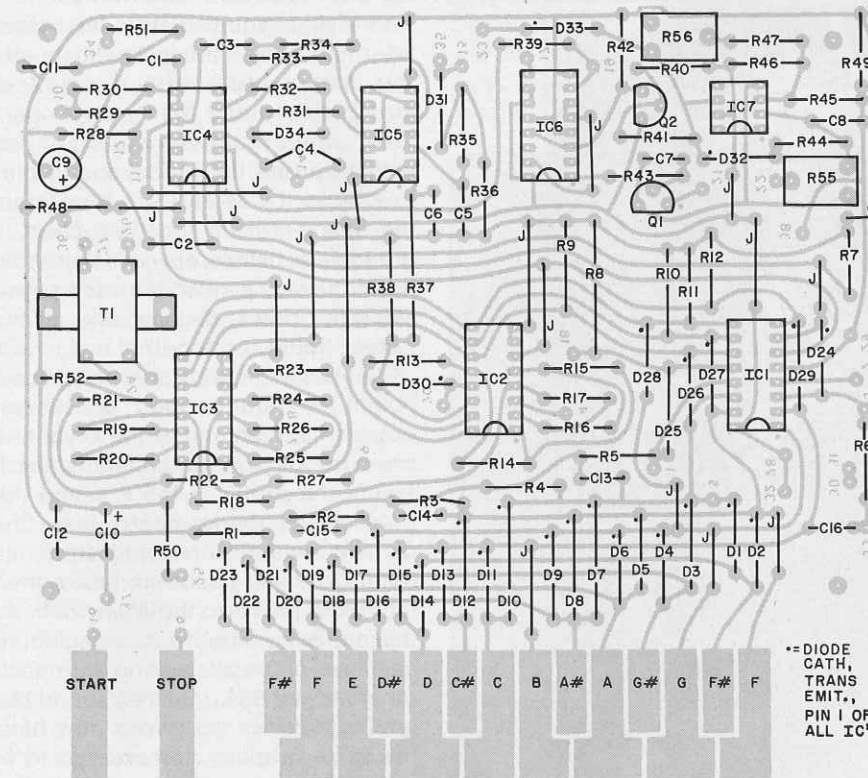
Etching and drilling guide for printed circuit board is at right; component layout on opposite page. Table below layout gives connections to numbered points on the pc board.
